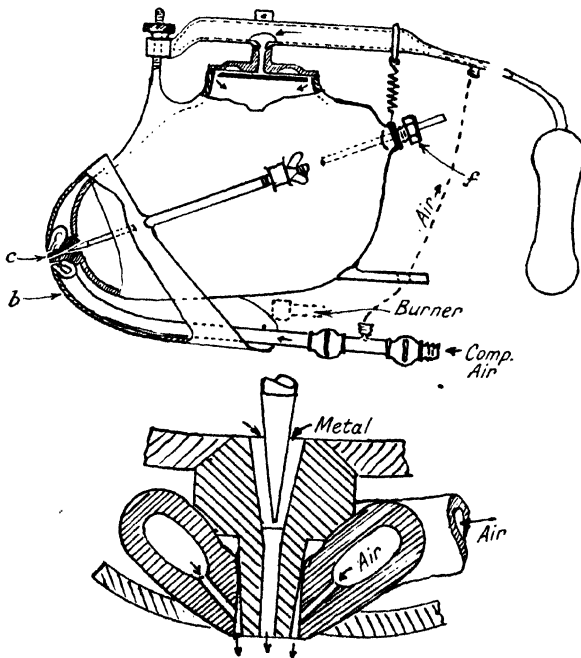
Early Mellowes Pistol, Pressure Type.
